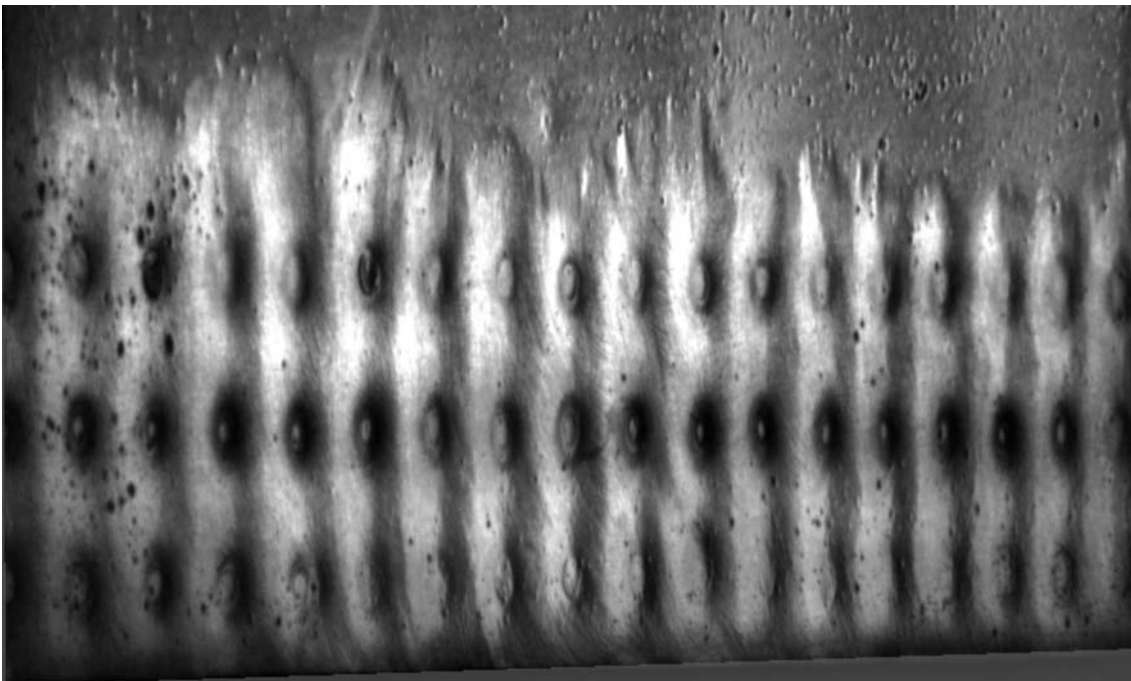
DAIS View of Pillowed Skin Suffering Surface Grinding.
